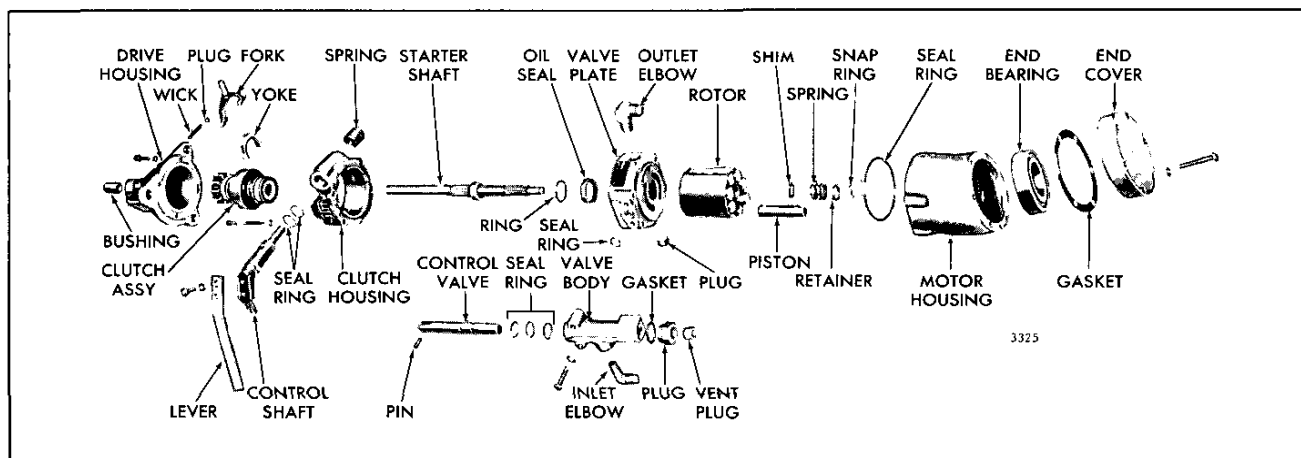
Hydrostarter Motor Details and Relative Location of Parts ("20" Series Motor Shown)
